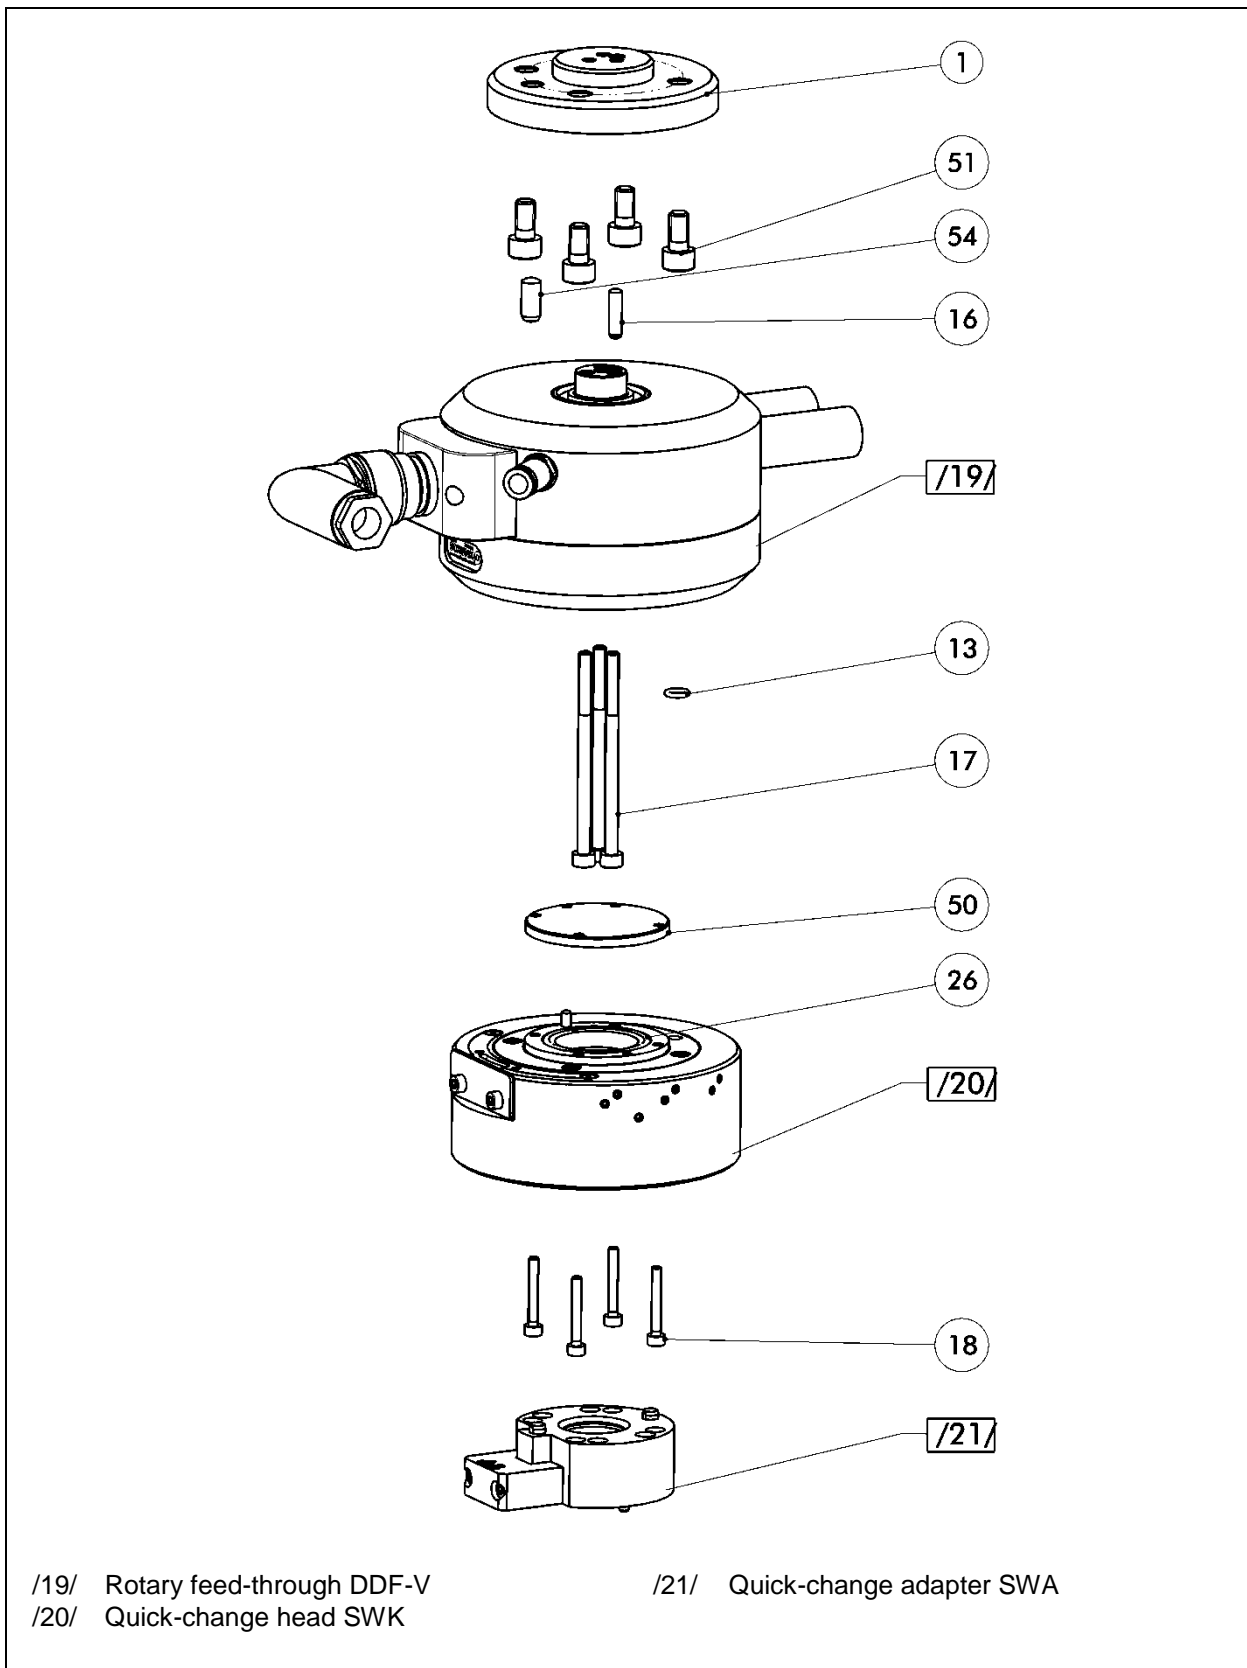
Assembly drawing DDF-V with SWS-I-011
